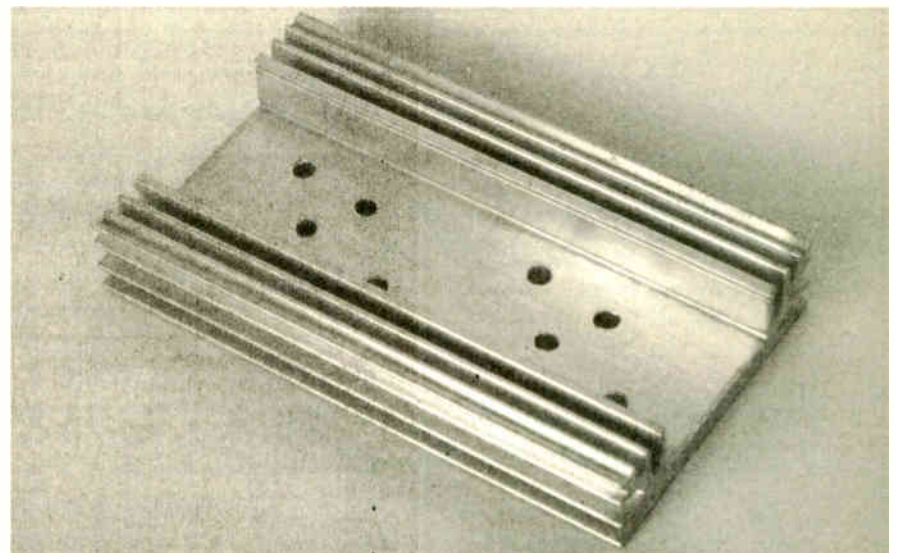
An extruded aluminium heatsink drilled to take two TO3-cased devices.
